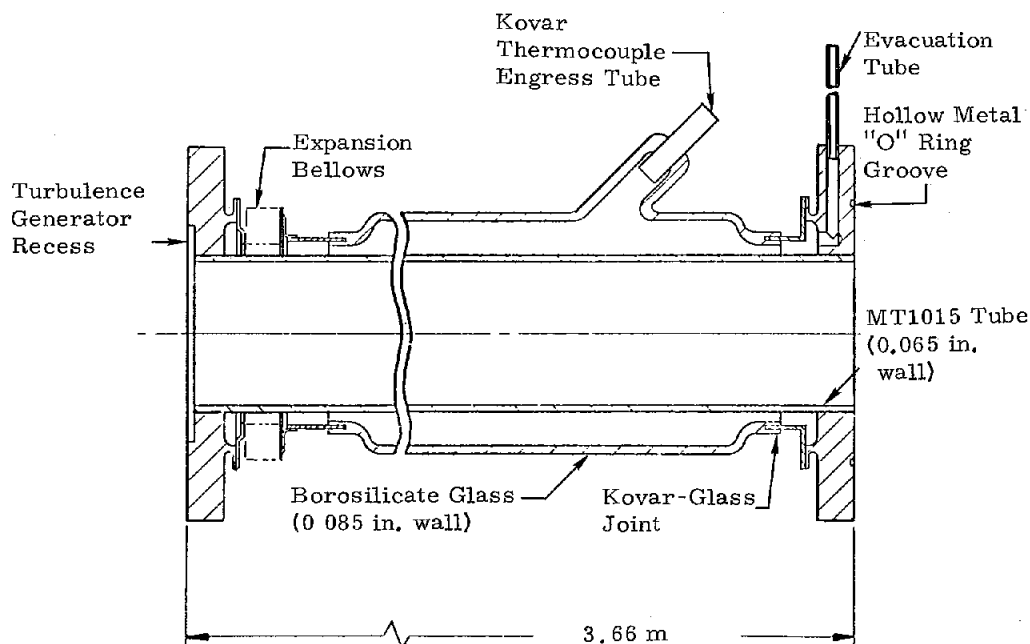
Collector Pipe Assembly (dwg. S15424)
